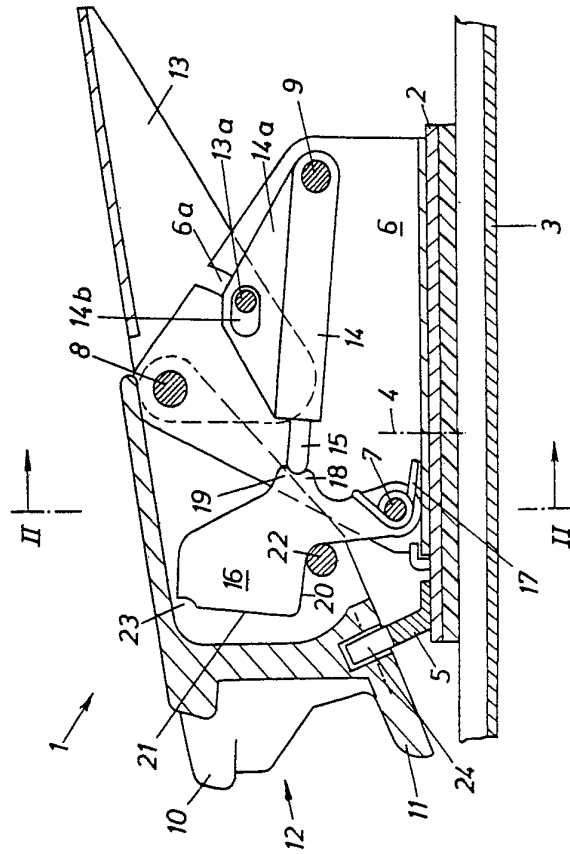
is a perspective view of a mechanical assembly. It shows a base plate 3 with a layer 2. A component 1 is mounted on the base, featuring a pivot 9 and a lever arm 14. A spring 13 is connected to the lever arm. A component 10 is shown in a dashed position, indicating movement. Other parts are labeled with numbers 1 through 24.
